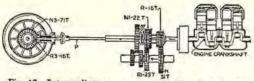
Intermediate or second gear. Note that the drive is from the engine crank shaft, to the drive gear (R), to the driven gear (N), to the drive gear (R1), to the driven gear (N1), to the drive gear (R3), to the driven gear (N3).
